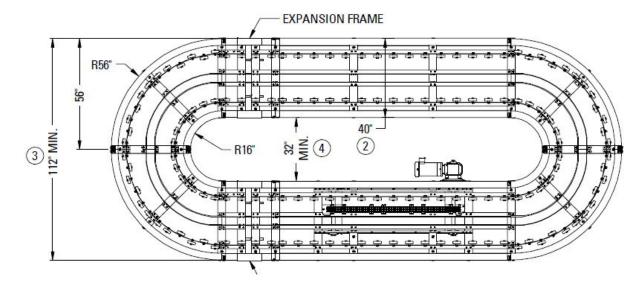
8000 Series Uni-Plate[™] Carousel Layout with Dimensions. (Unified Supply, 2015)
